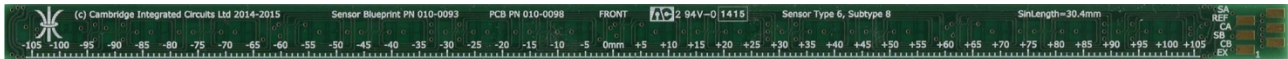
Sensor PCB Assembly 013-0035, FRONT
